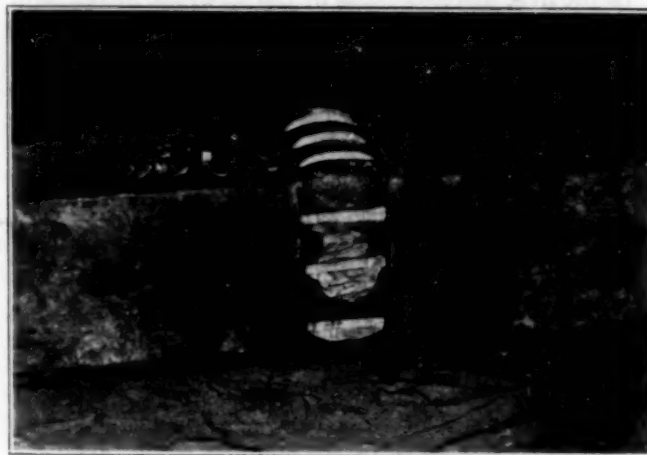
GROOVES CUT IN COLLARS OF THERMIT WELD MADE IN 9x10-IN. BARS
